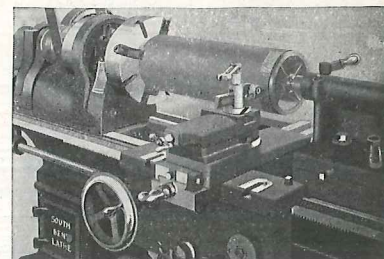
Machining a large wrought iron pipe in the lathe showing the application of the pipe centers.
